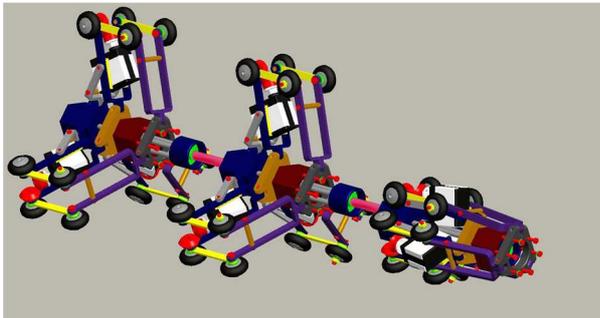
Overall design of wheeled machine with adjustable wheels CEREVKA
